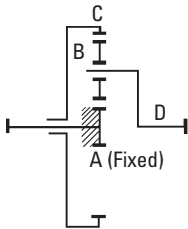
(b) Solar Type Planetary Gear Mechanism
